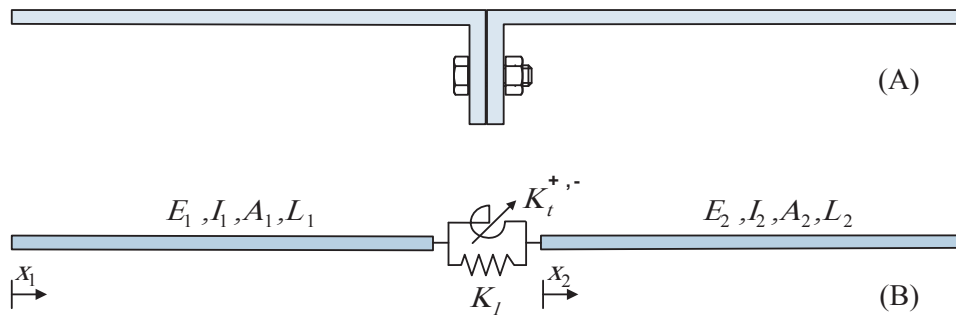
Schematic of beams connected by single bolt flange joint (A); and equivalent model (B).
